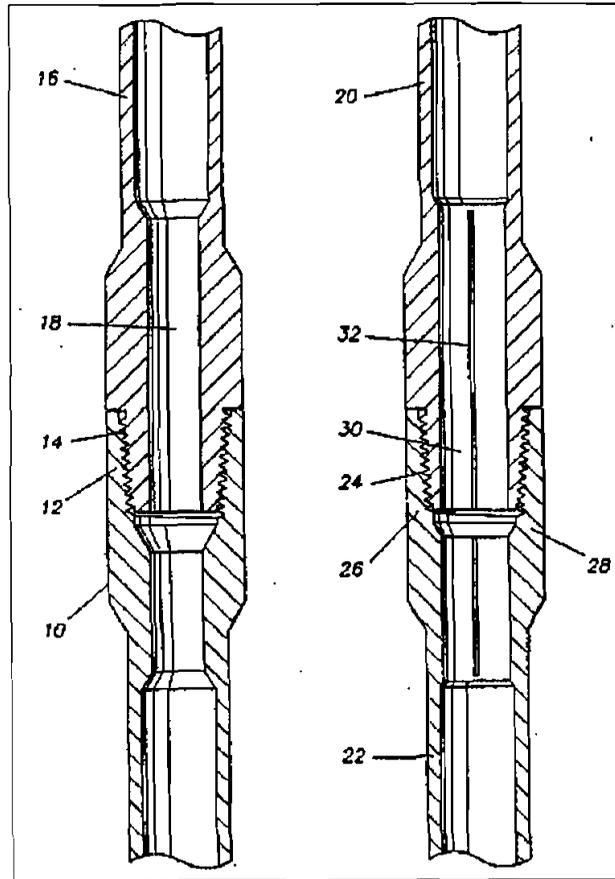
Conventional (left) and Improved (right) Tool Joints (Chatagnier and Head, 1995)
